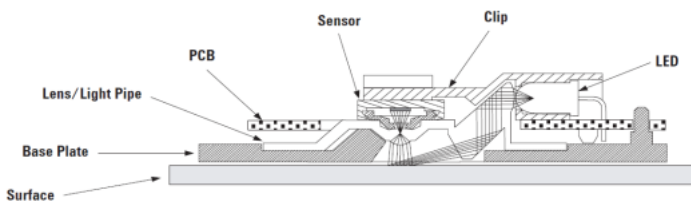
Sectional view of PCB assembly highlighting optical mouse components (optical mouse sensor, clip, lens, LED, PCB and base plate).
